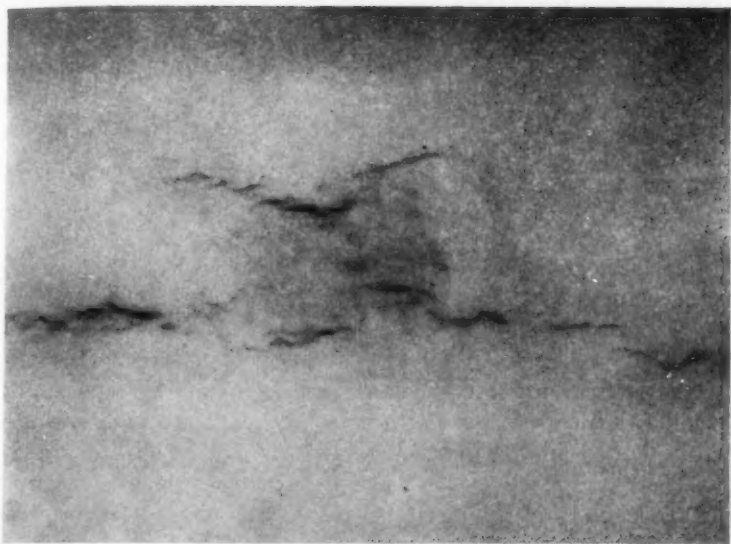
RADIOGRAPH OF INTERNAL HOT TEAR IN A 2-IN. SECTION OF A STEEL CASTING.
